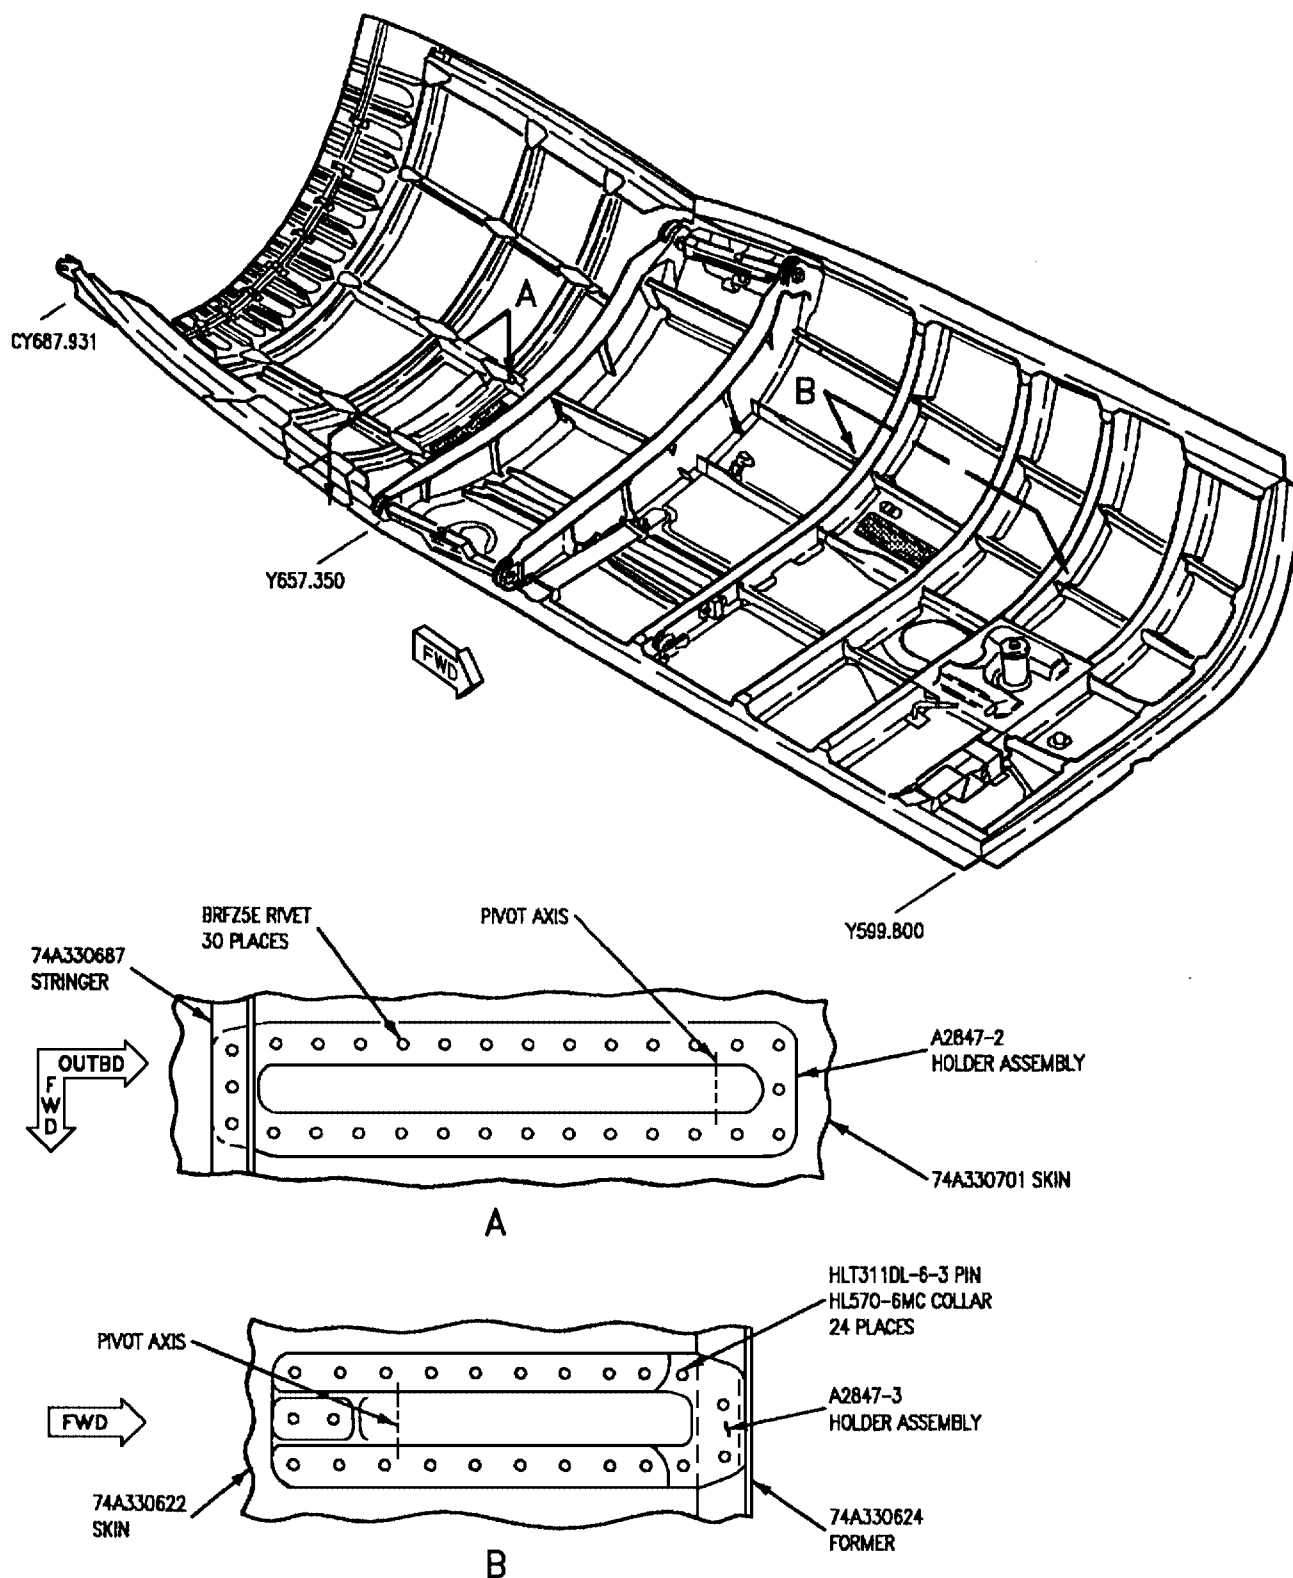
A2847-2, A2847-3 Holder Assembly Replacement
